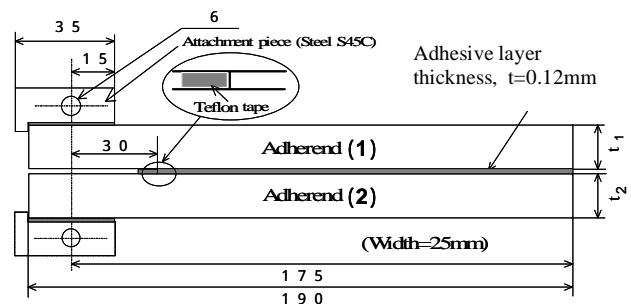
Shape and dimensions of the adhesively bonded DCB joint.
